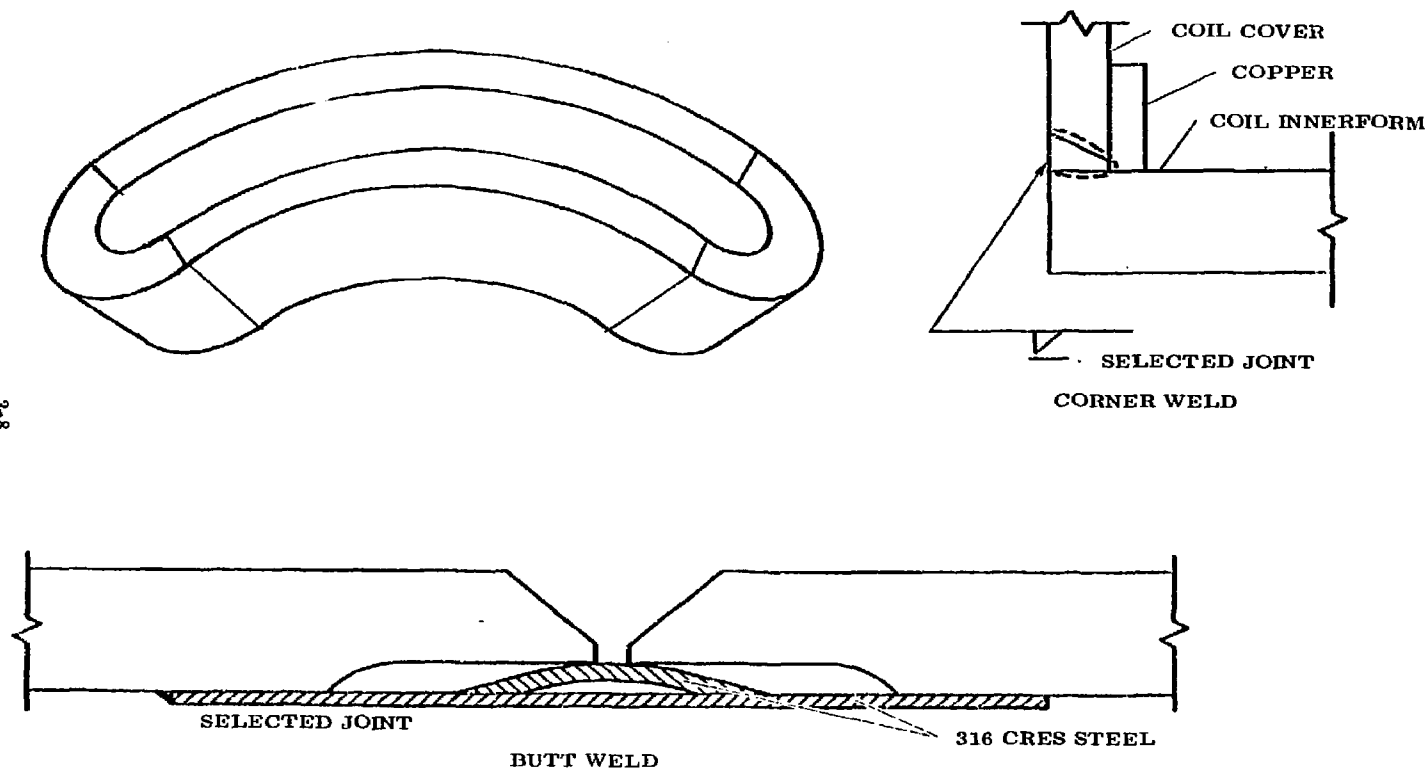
LLL Developed Close-Out Weld Has Been Incorporated in the Jacket Covers
